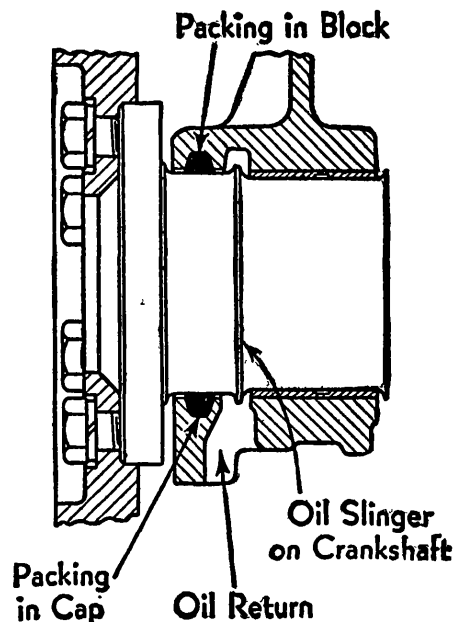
Rear main bearing oil slinger, 1939-49 Sizes and all 1950-52
